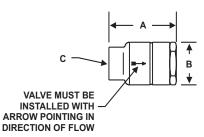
Check Valves (1/2-inch to 1-1/4-inch)
